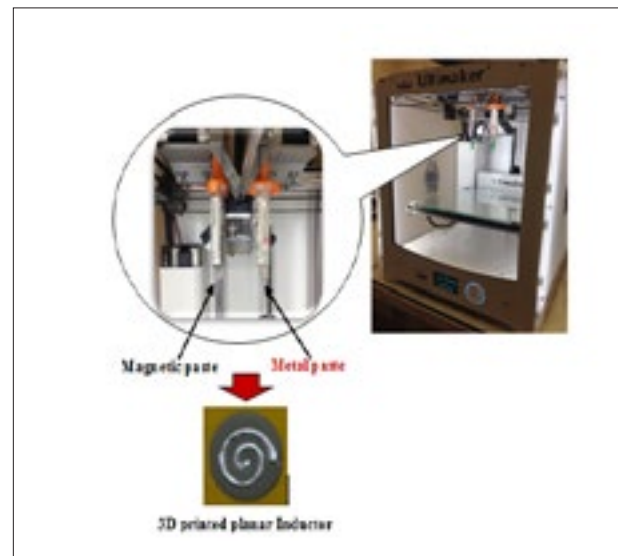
Custom-modified FDM 3D printer for dispensing pastes stored in two separate syringes and a 3D printed planar core.
